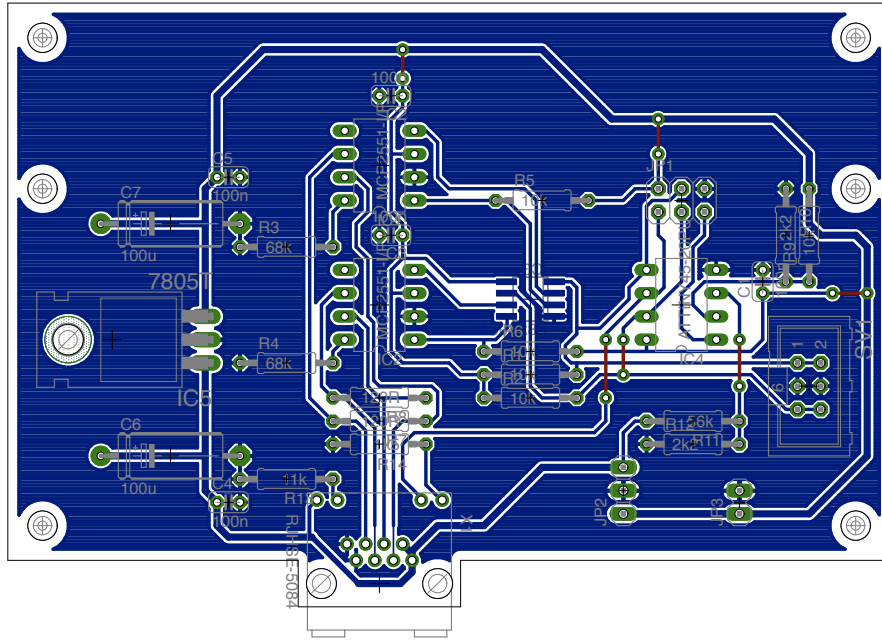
PCB layout of the CAN to I²C converter. The one-sided layout has a size of 97 mm × 66 mm and has drill holes matching the layout of the sensor modules to allow stacking with 20 mm straight connectors.
